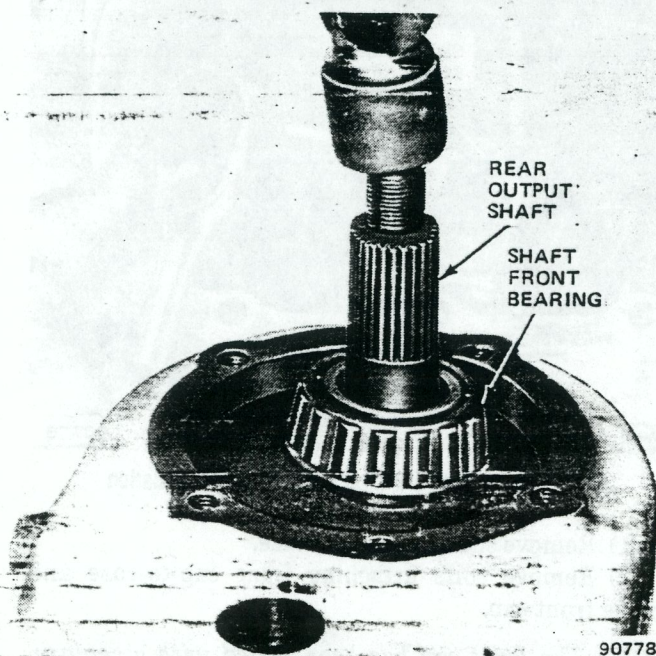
D-80 Rear Output Shaft Front Bearing Removal
